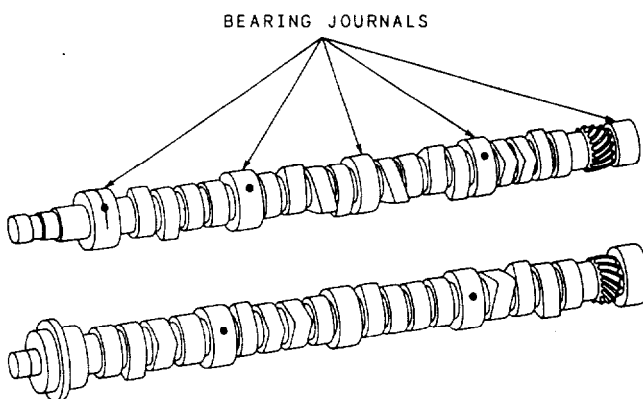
Camshaft with bearing journals in a V-type engine.
